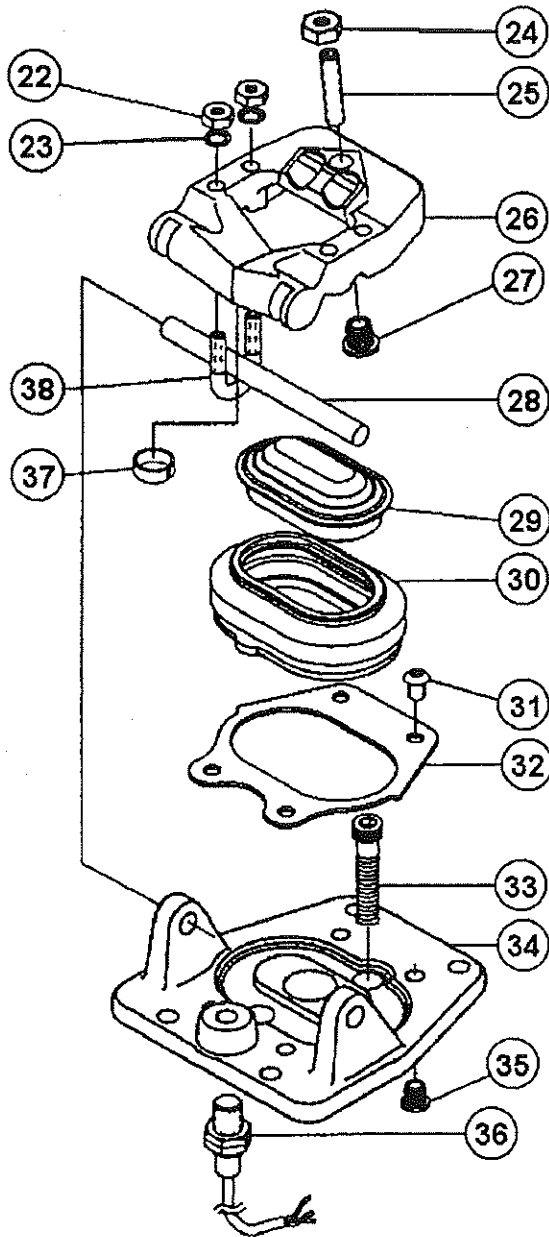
BRAKE PEDAL VALVE ASSEMBLY
